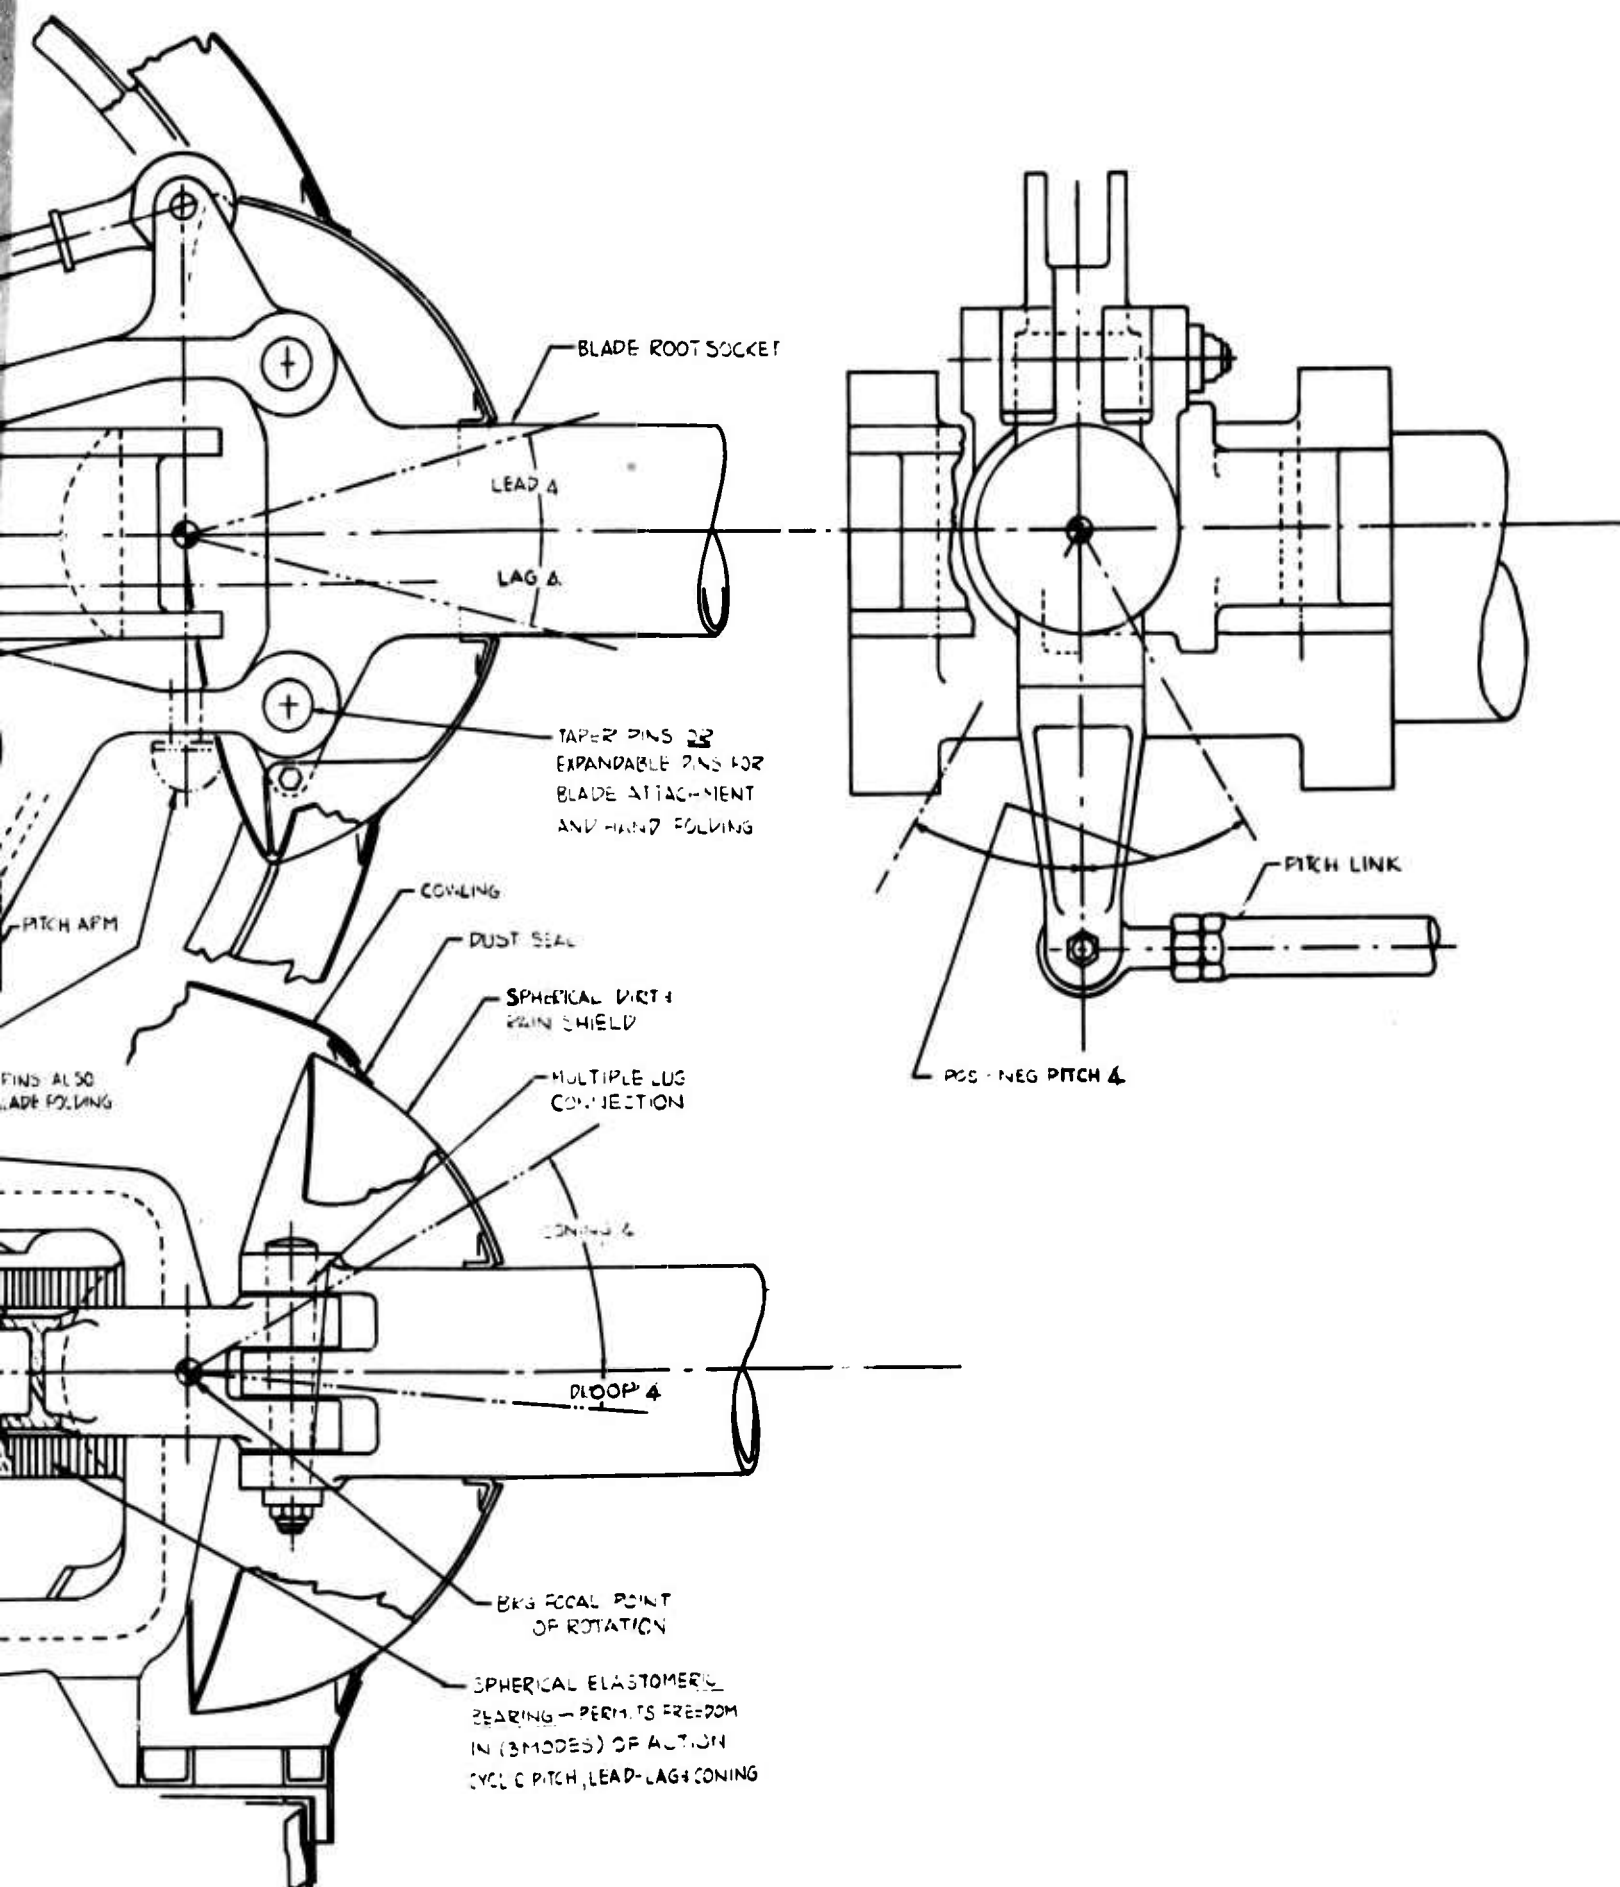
Coincident-Hinge Elastomeric Bearing Rotor Hub.
